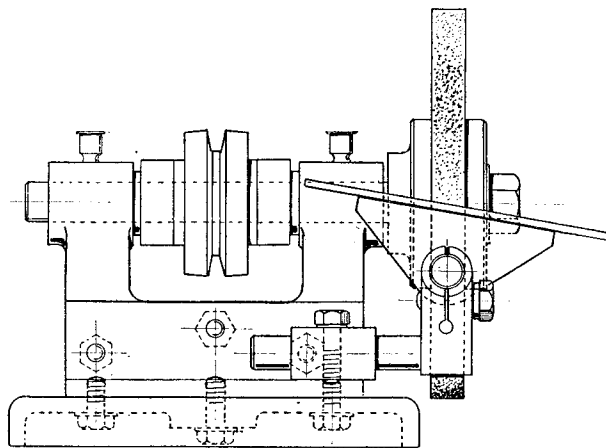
A grinding head suitable for sharpening tungsten-carbide tools
